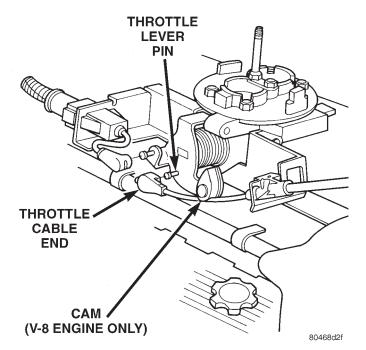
Throttle Cable at Throttle Body—5.2L/5.9L V-8 Engines
